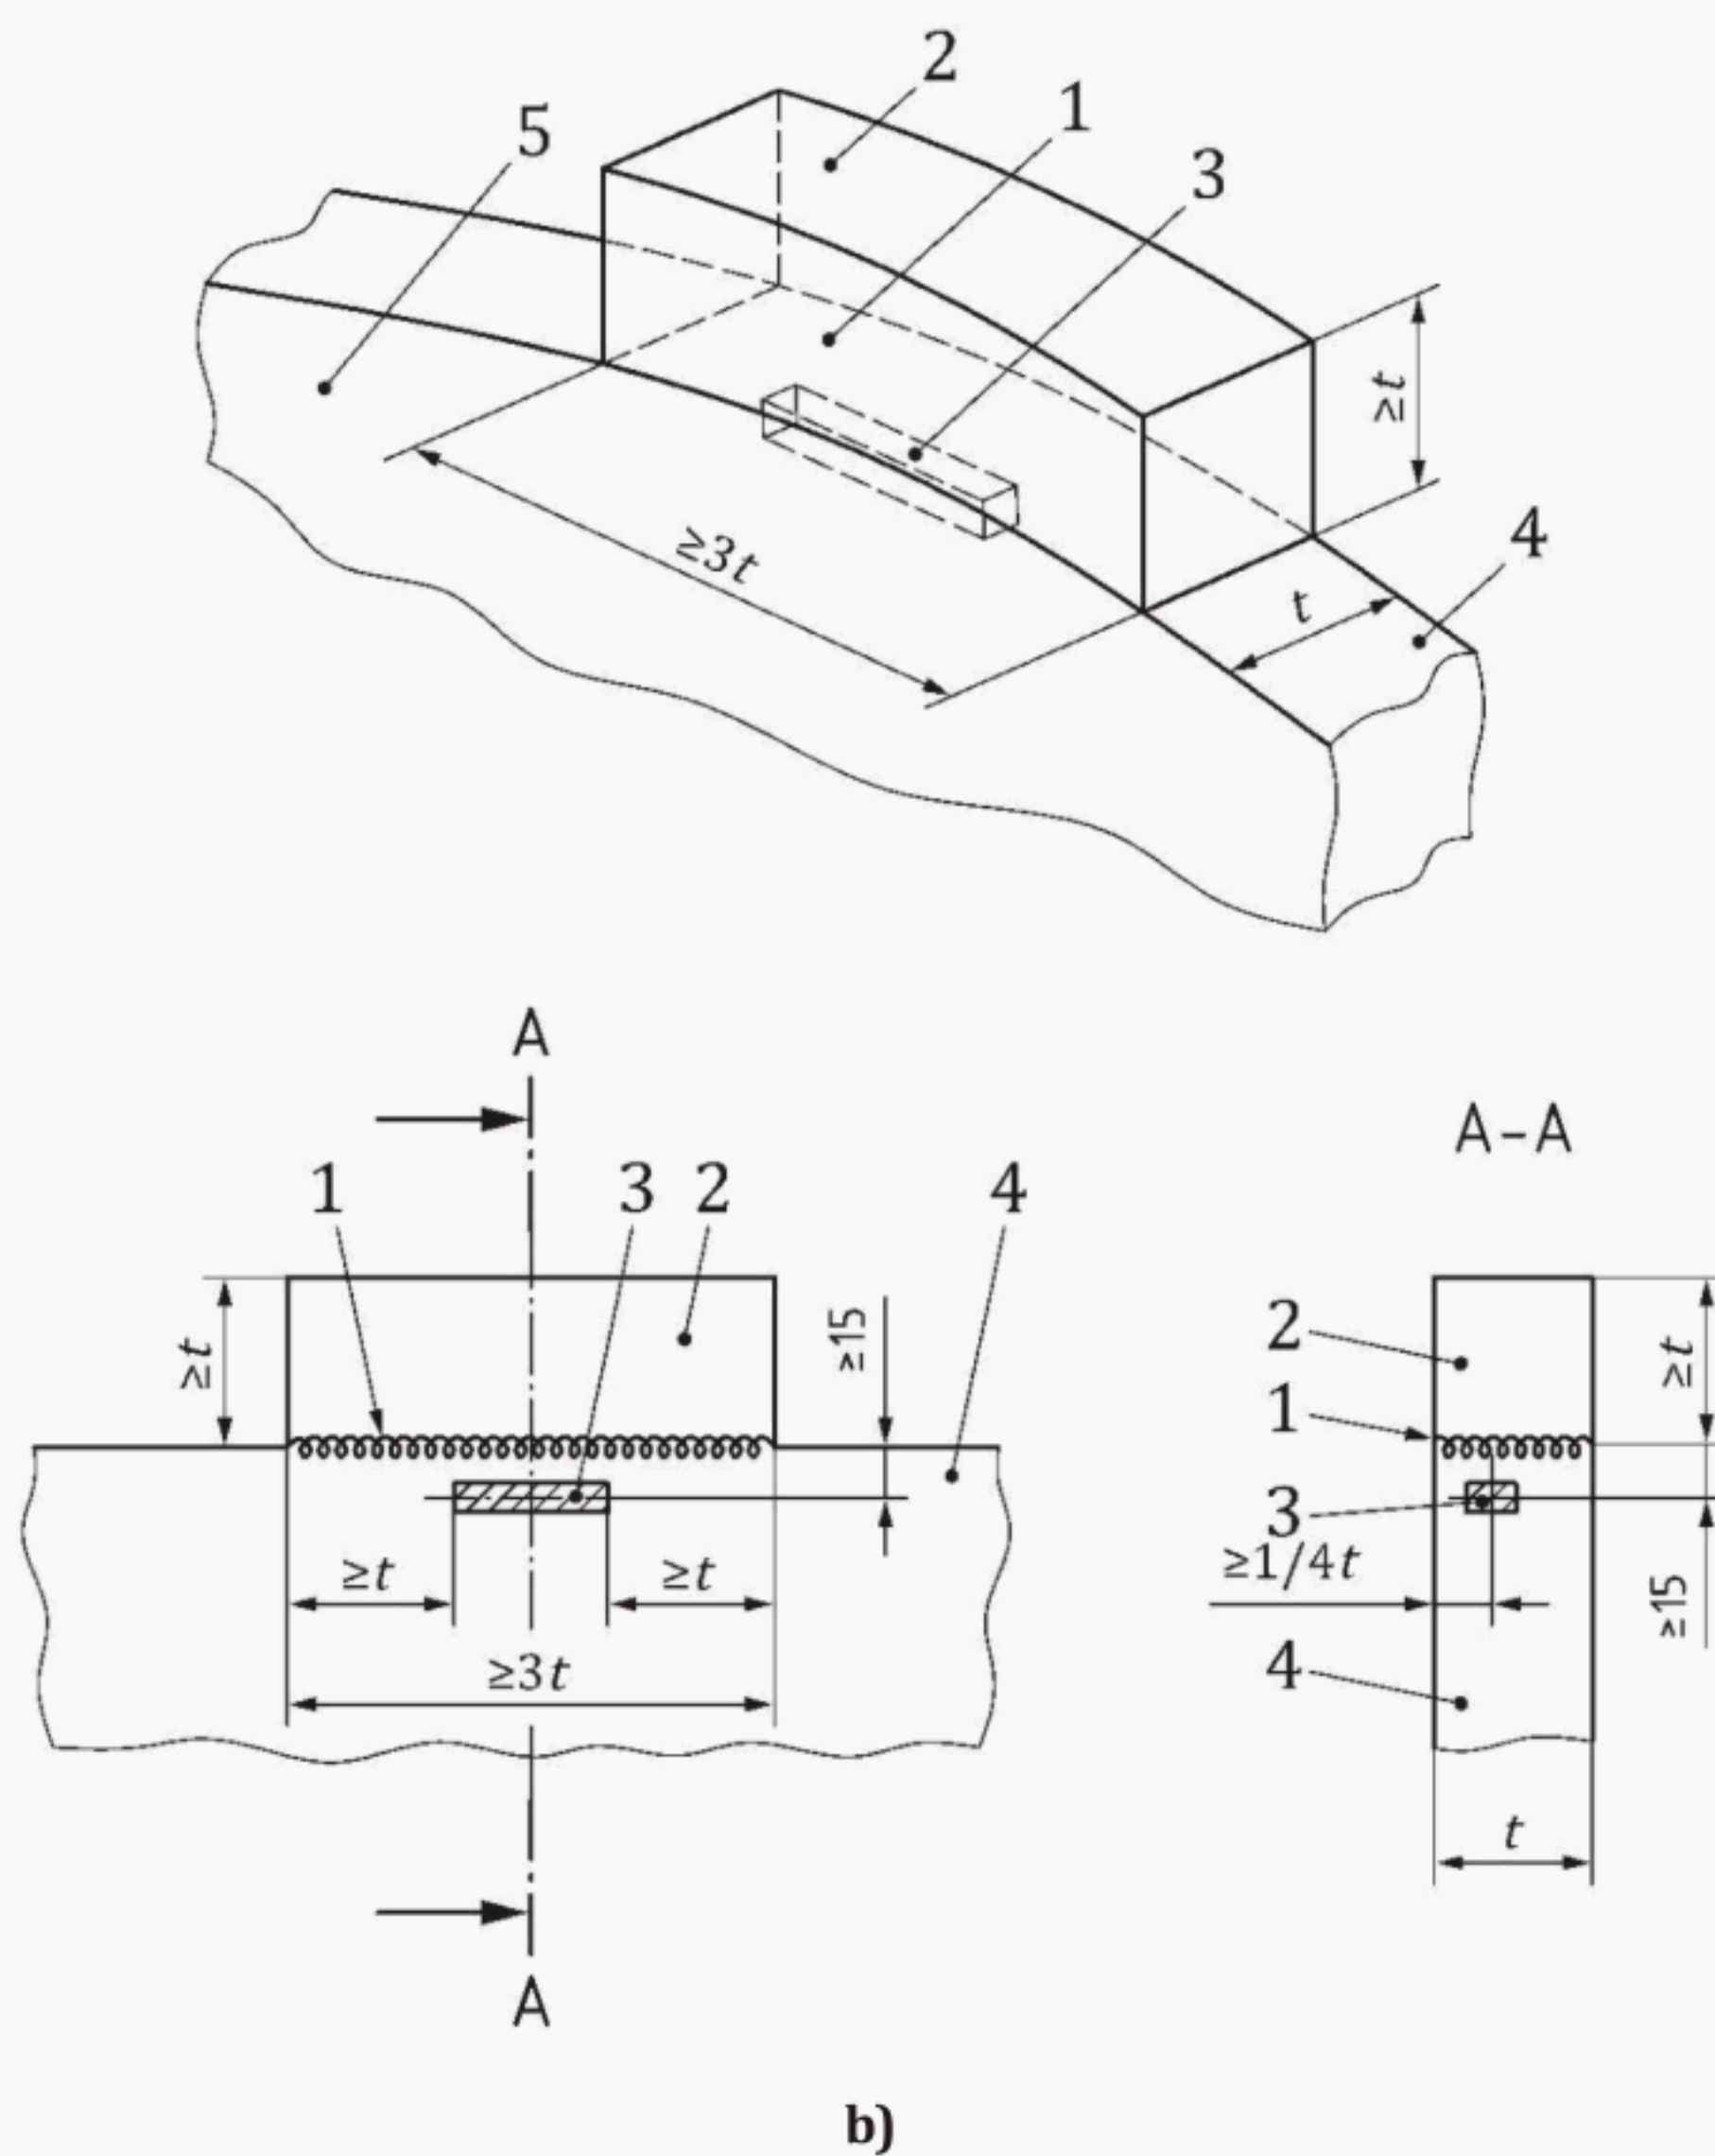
Examples of the mounting of integral surplus material and of the location of test pieces
